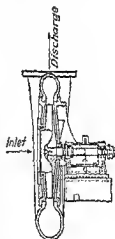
Pedestal-type Single-stage Compressor. (Roots-Connersville Blower Corp.)
